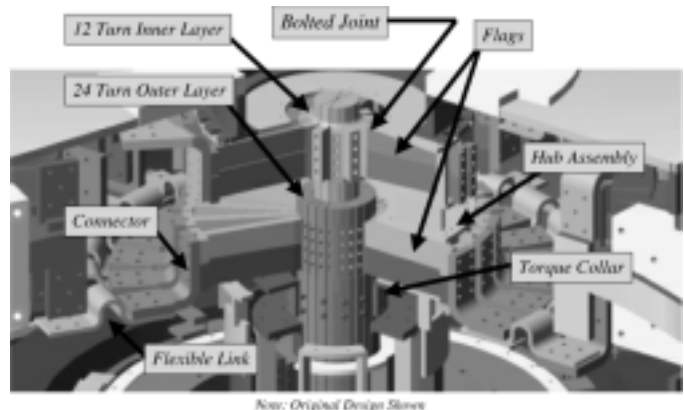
Zoomed View showing Connections from Inner to Outer Leg
